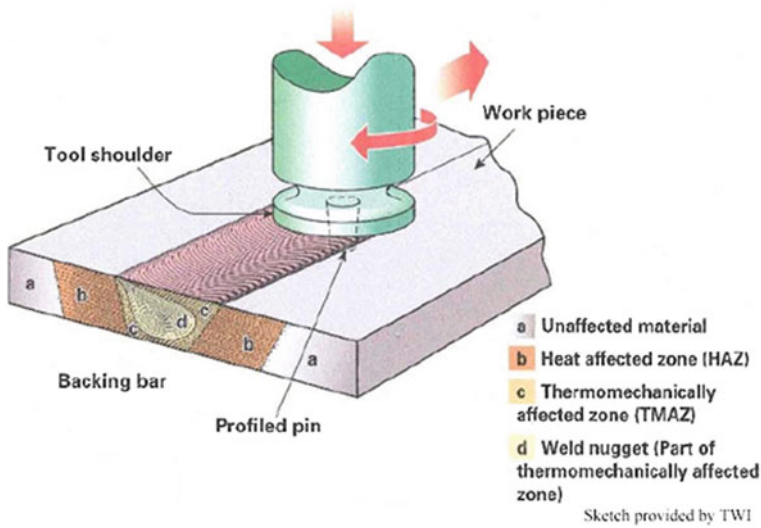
Schematic of friction stir welding process showing the interaction of the tool with the material (courtesy of TWI)
